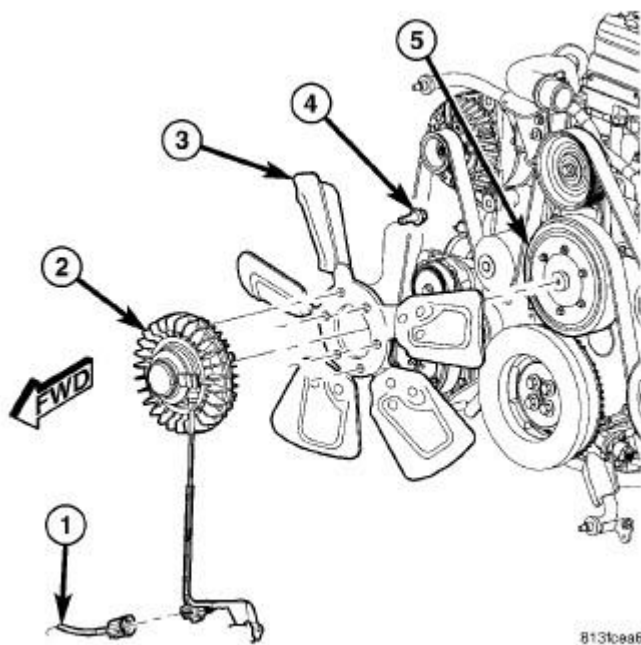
Fan Blade/Viscous Fan Drive -- Diesel
